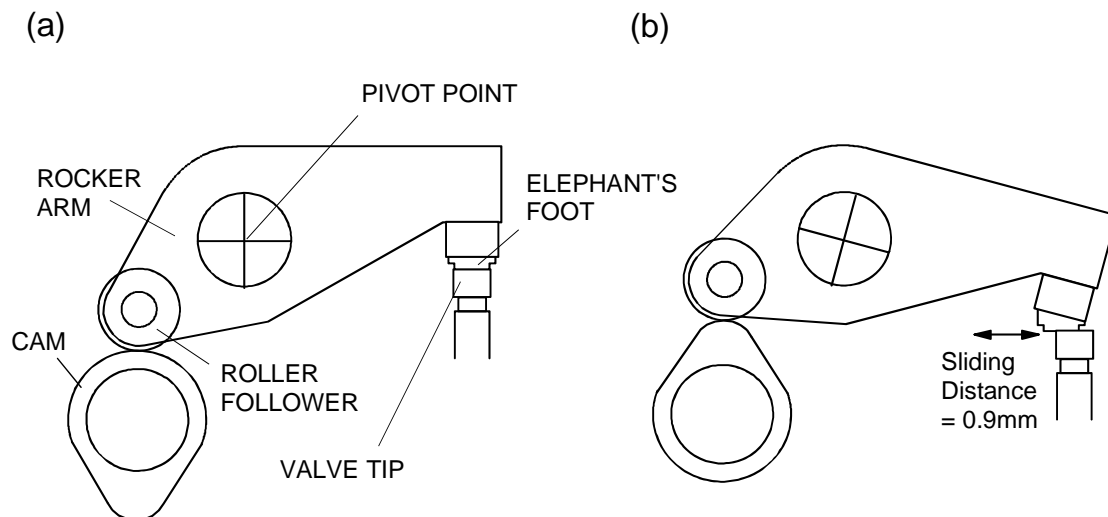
Rocker Arm Dimensions and Magnitude of Motion between (a) Valve Closed Position and (b) Valve Open Position.
